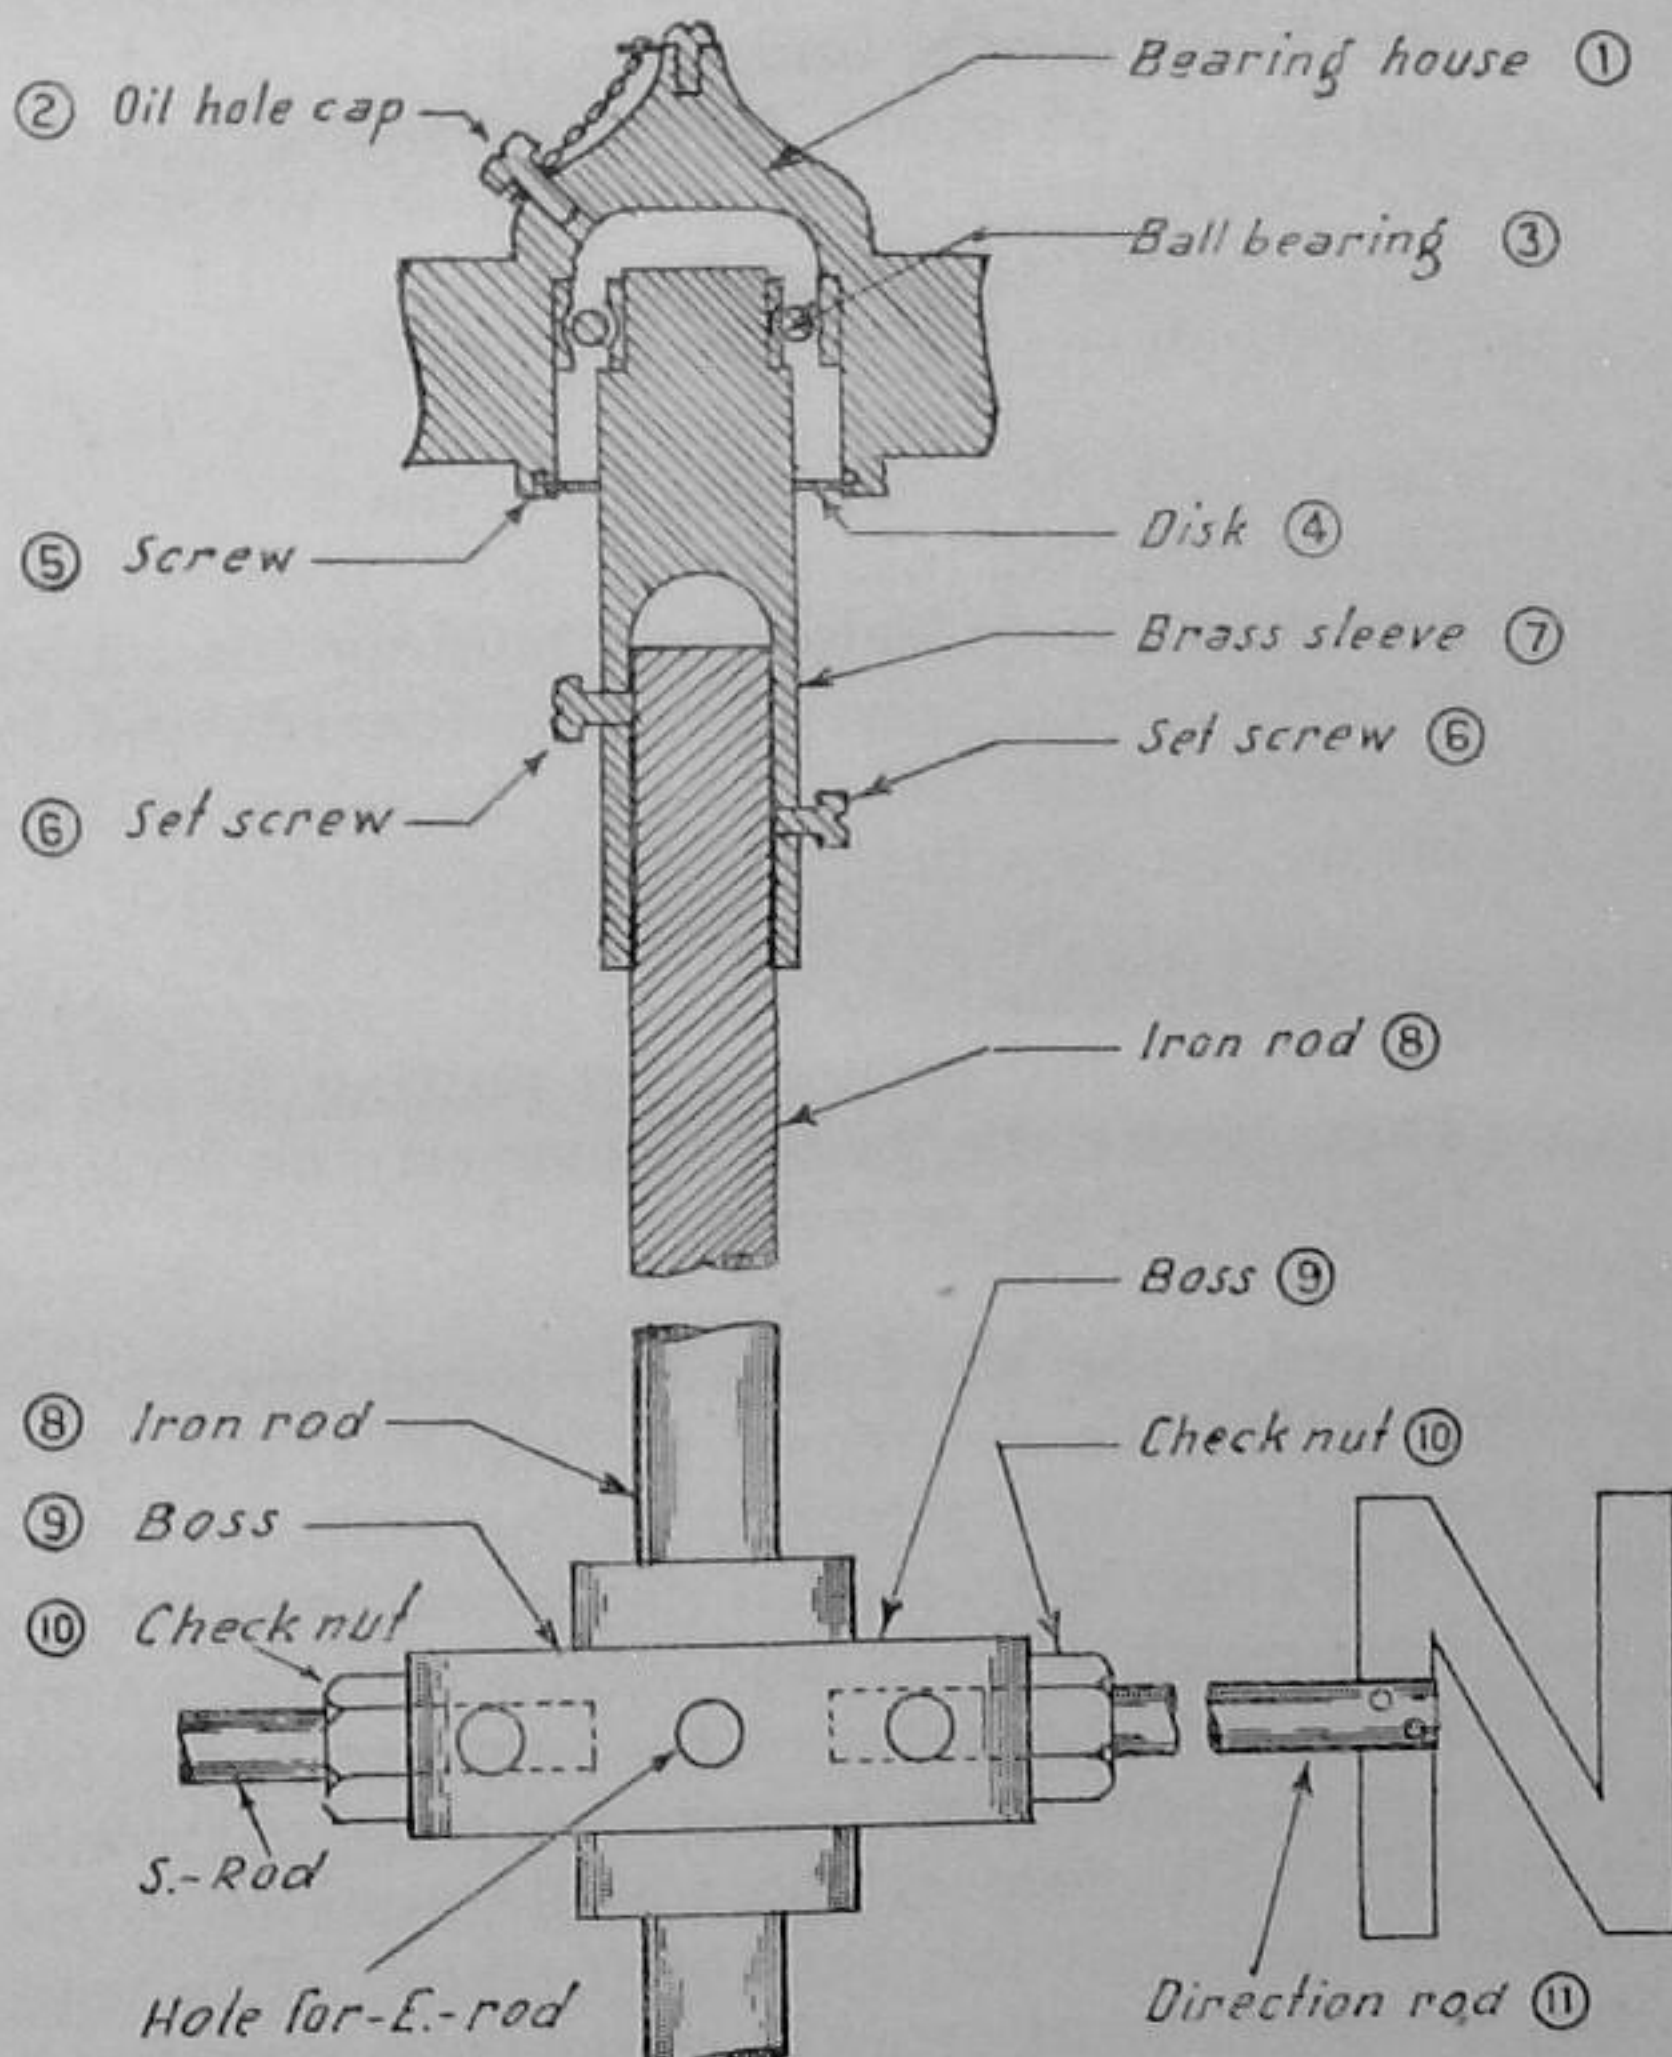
SECTIONAL VIEW OF I. M. D. WINDVANE.
